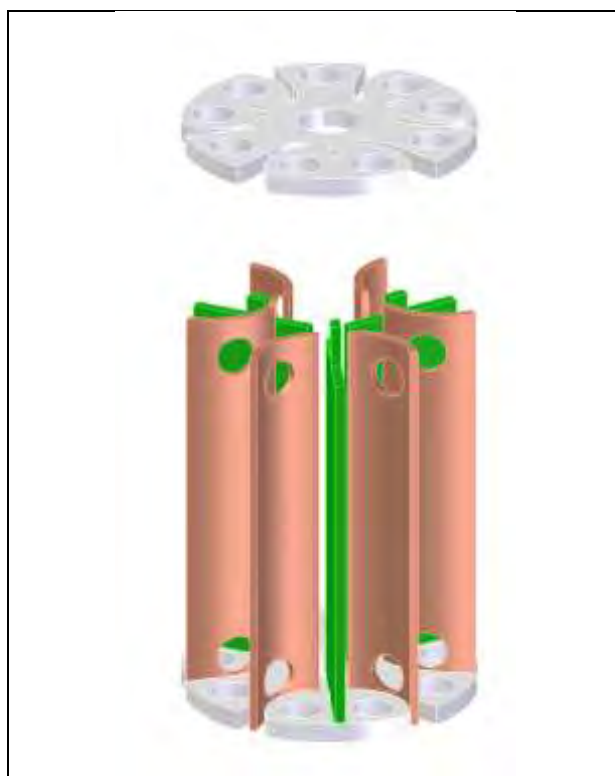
Schematic of NMCA corrosion module used in GNF MITR-II tests showing cladding coupon samples surrounded by flow separators and alumina fixture parts
